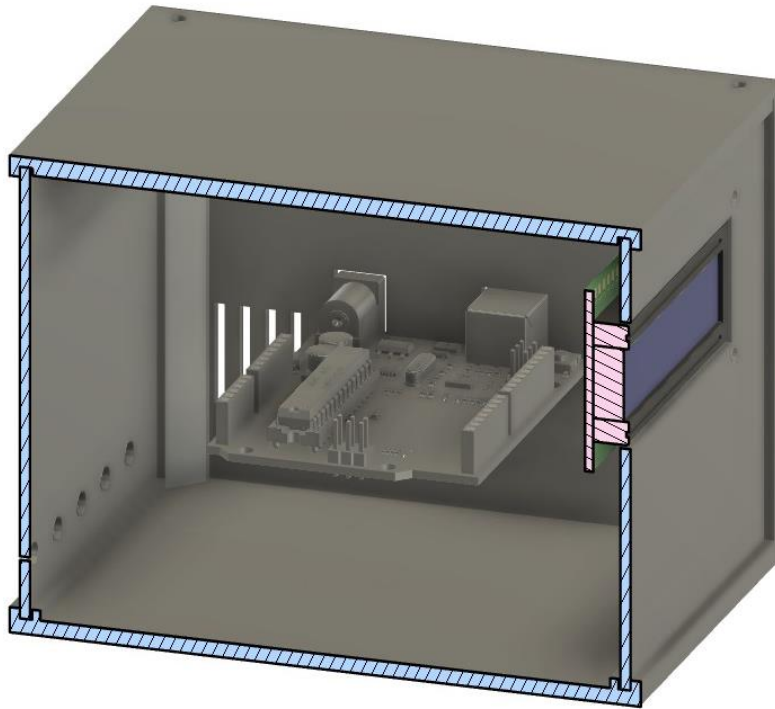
Cross-section view of the 3D-designed housing for FSMCU.
